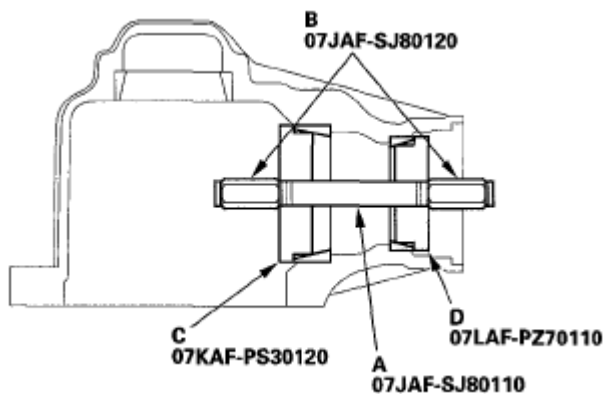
Identifying Tapered Roller Bearing Outer Race, Installer Nut And Shaft
